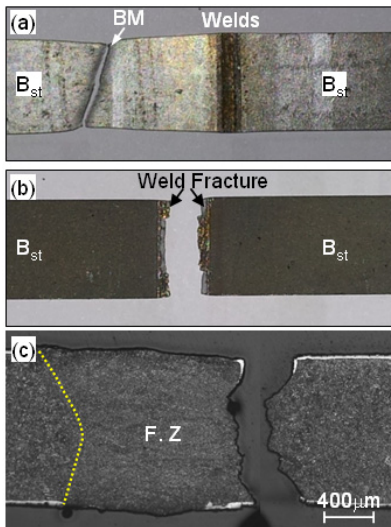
Appearance of fractured tensile specimens as weld (a), after hot-stamping (b) and cross-section of fractured bead (c) after hot-stamping.
